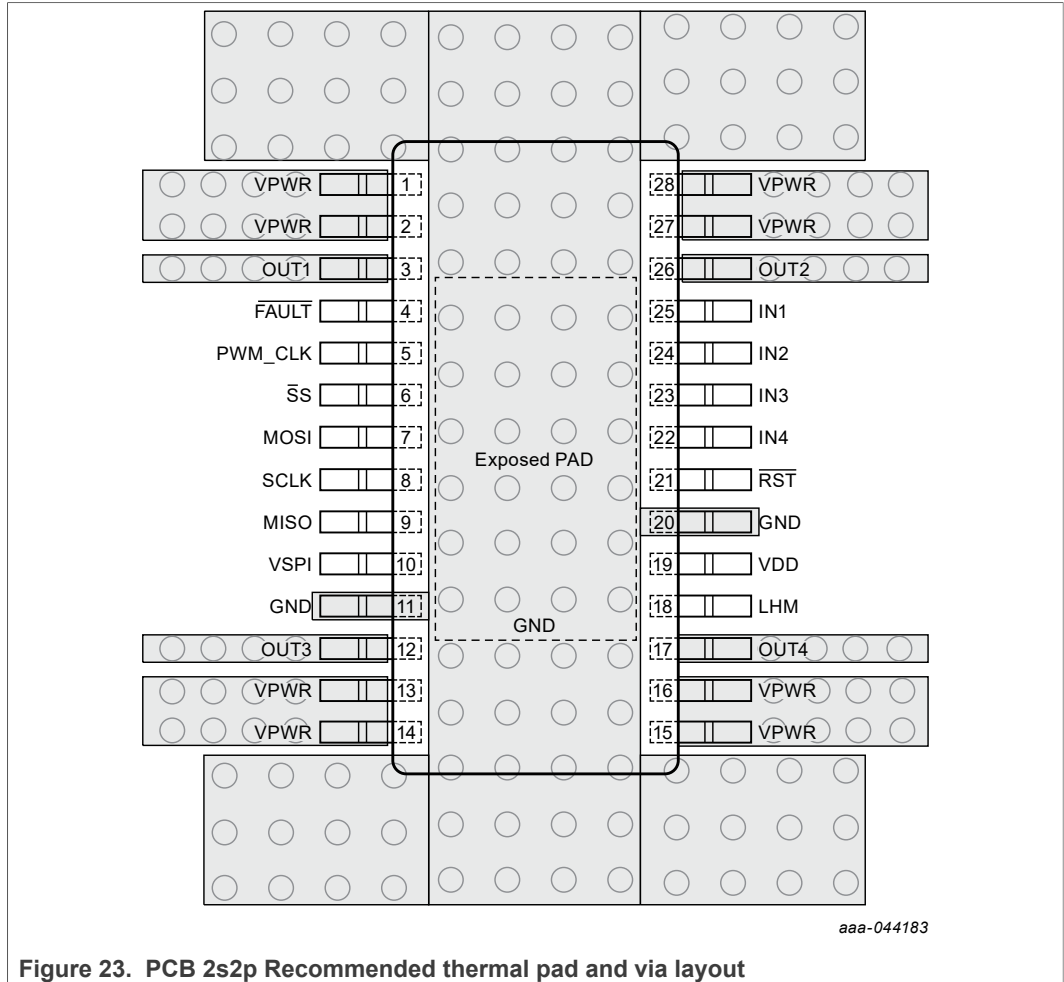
PCB 2s2p Recommended thermal pad and via layout
